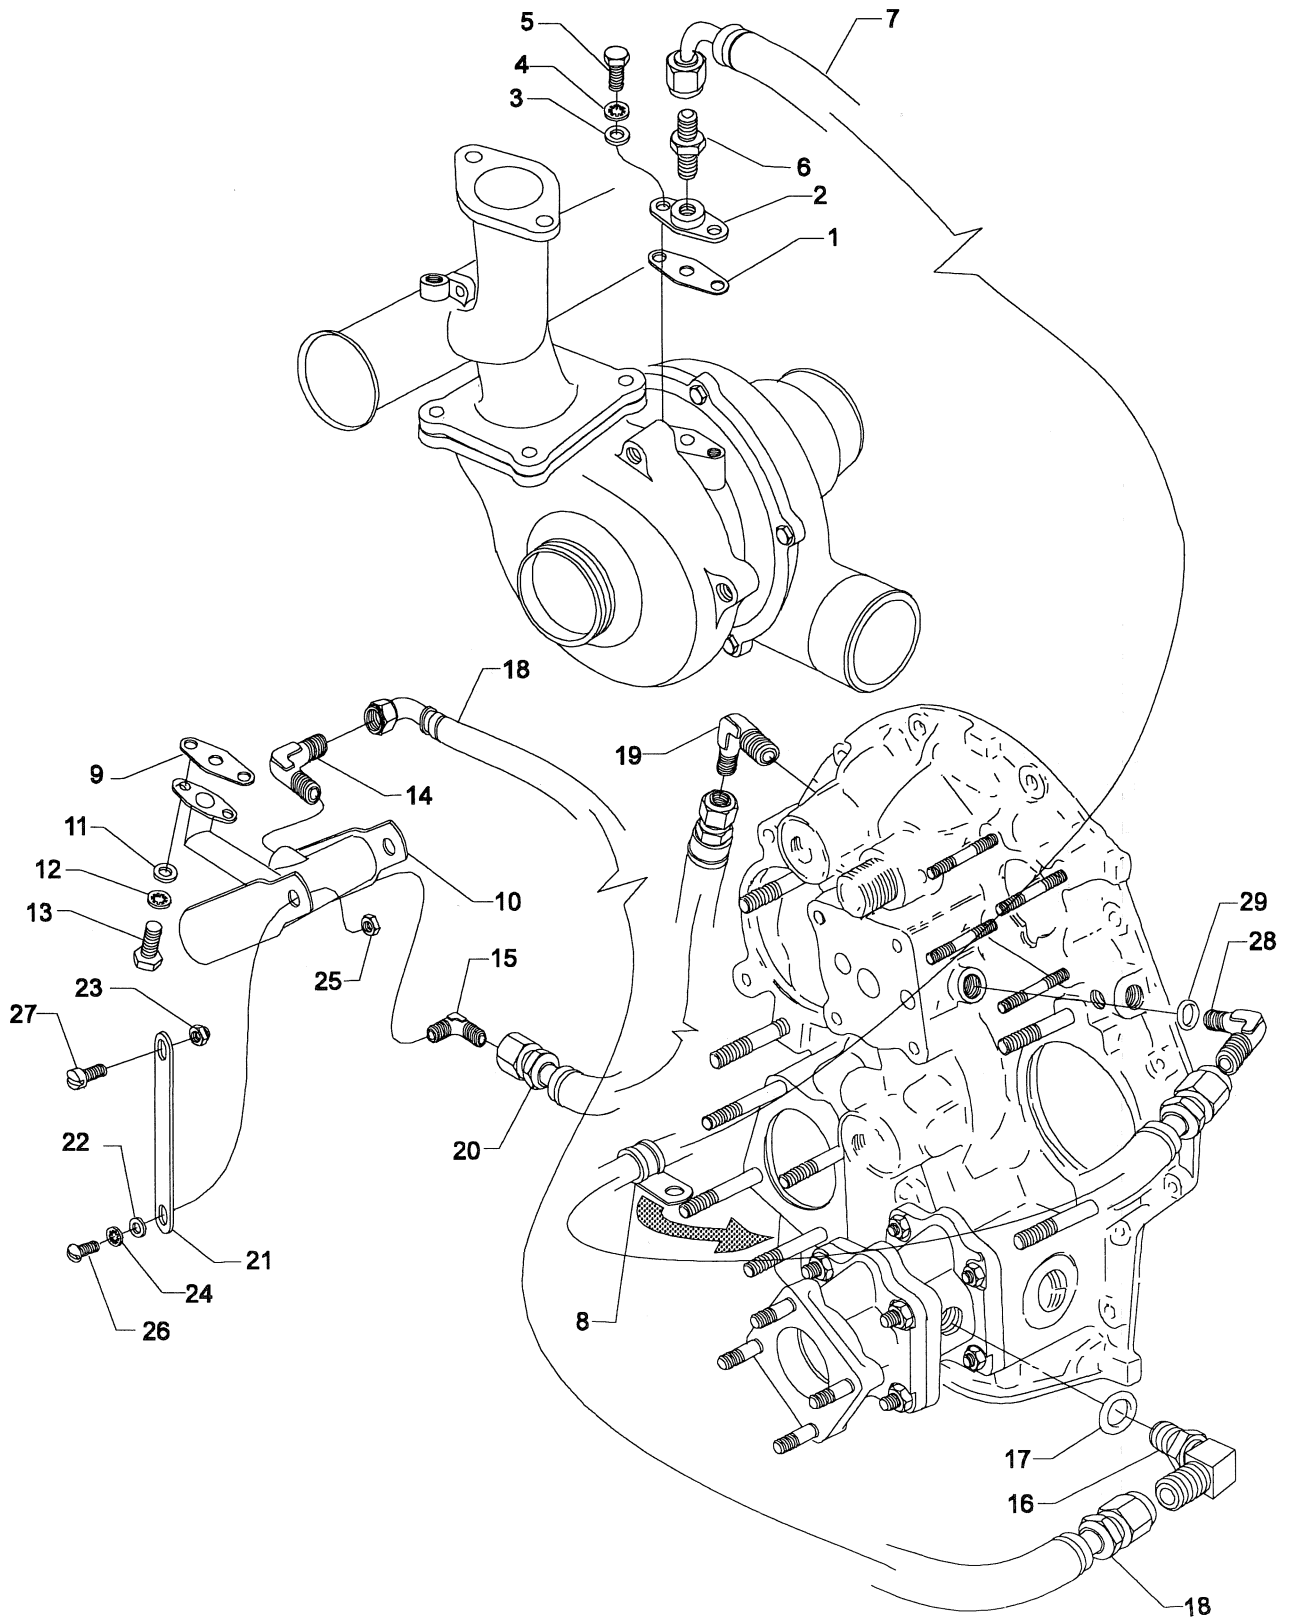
TURBO OIL DRAIN TANK AND RELATED PARTS
